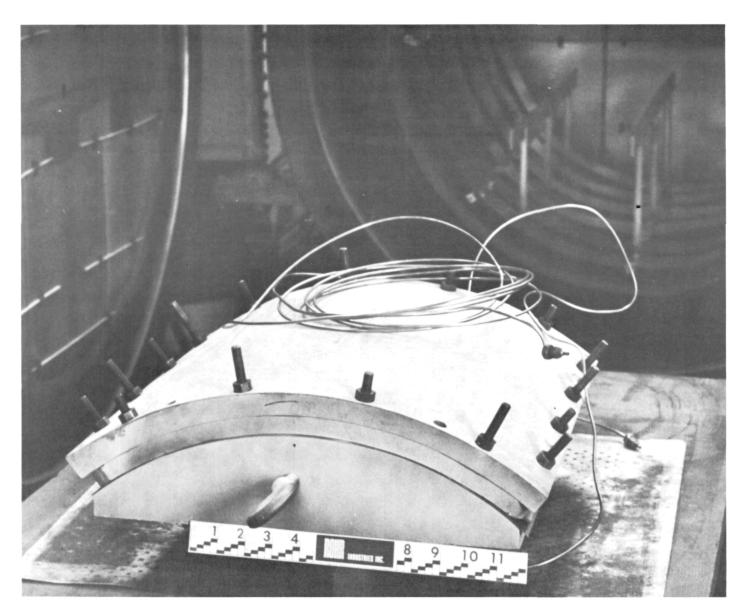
Tool for Superplastically Forming Skins Ready for Loading into Vacuum Furnace
